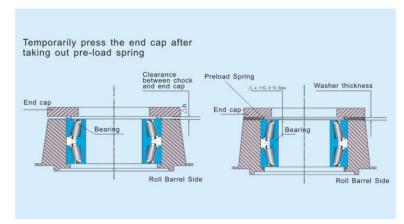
Fig5-5: The clearance adjustment for pre-load spring
